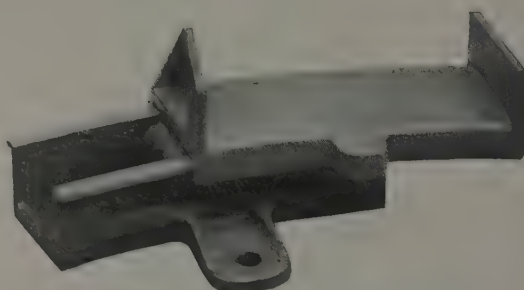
Susemihl Side Bearing for Freight Car Trucks.
